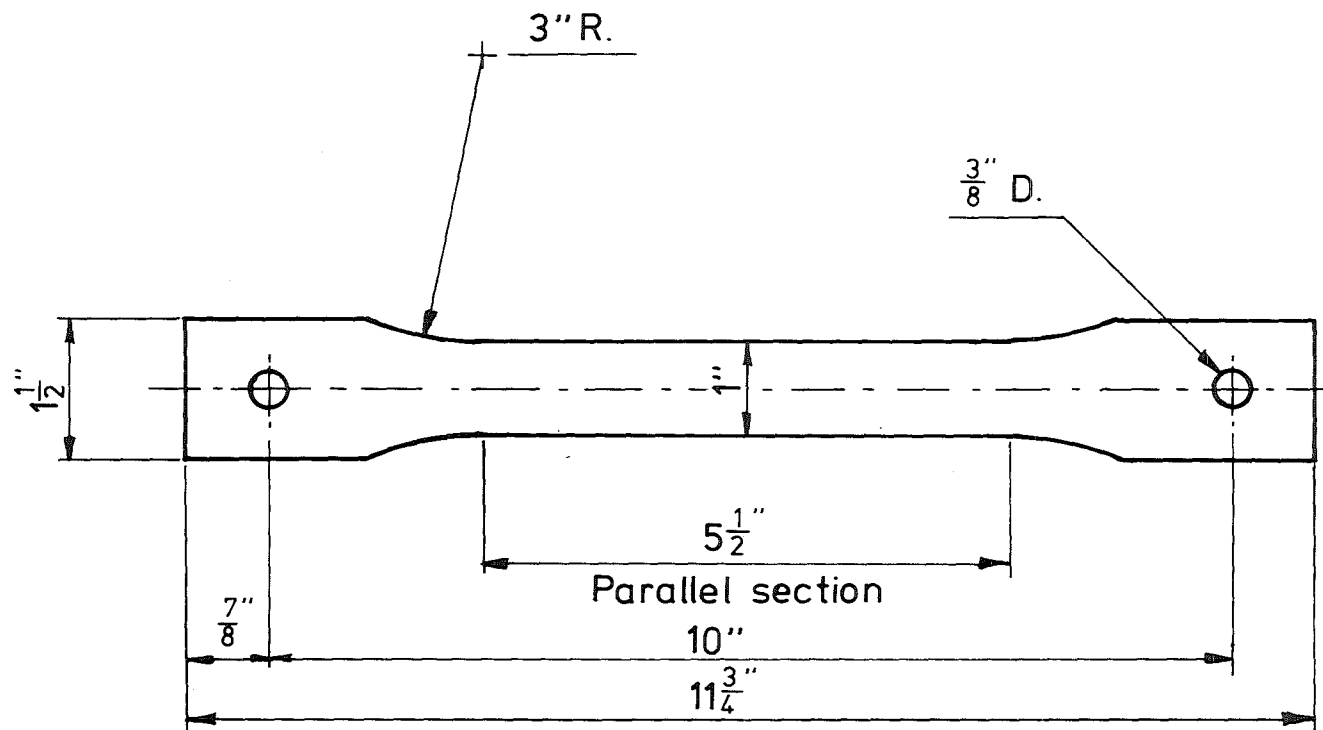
UNIAXIAL TENSILE TEST PIECE - (LARGE)
